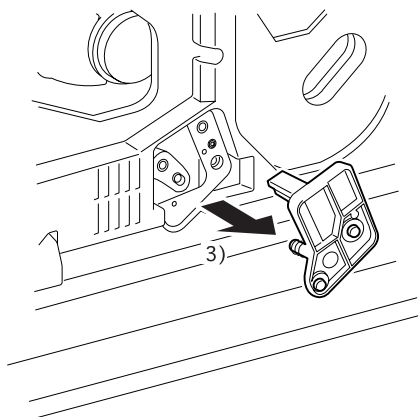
BELT CLEANER ASSEMBLY Removal (1/2)
